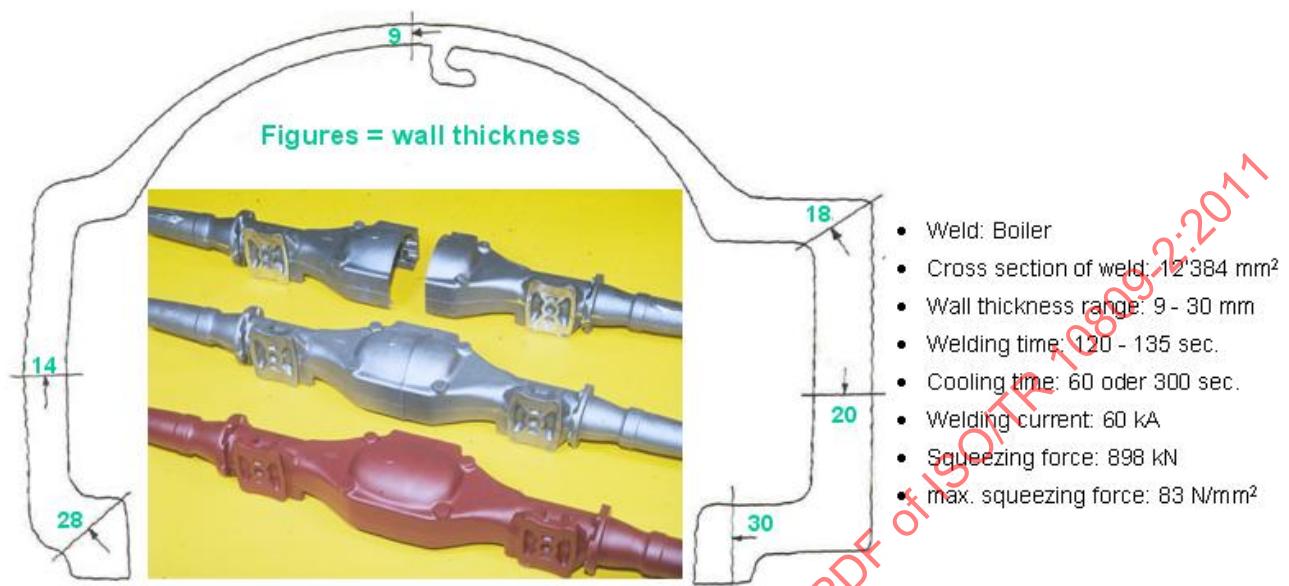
Overview of the freedom of profile design of the welding surface for components that can be flash-welded
